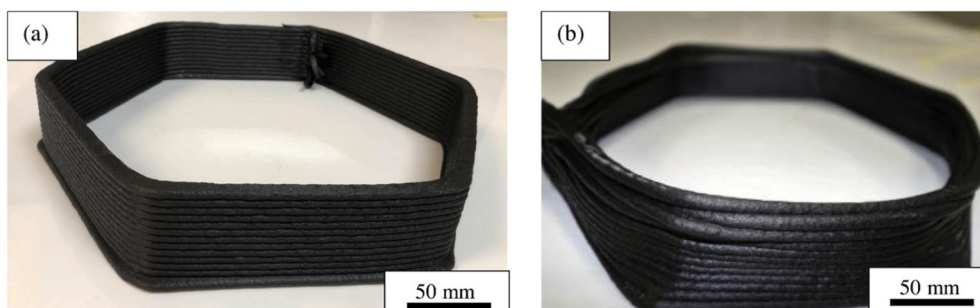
Hexagon geometries printed with a BAAM machine. Frame (a) depicts a hexagon printed with a 90 s delay between layers, while frame (b) depicts a hexagon geometry printed with no added layer time. Notice the difference in print quality where the part shown in (b) is defective, adapted from Ref. [50].
